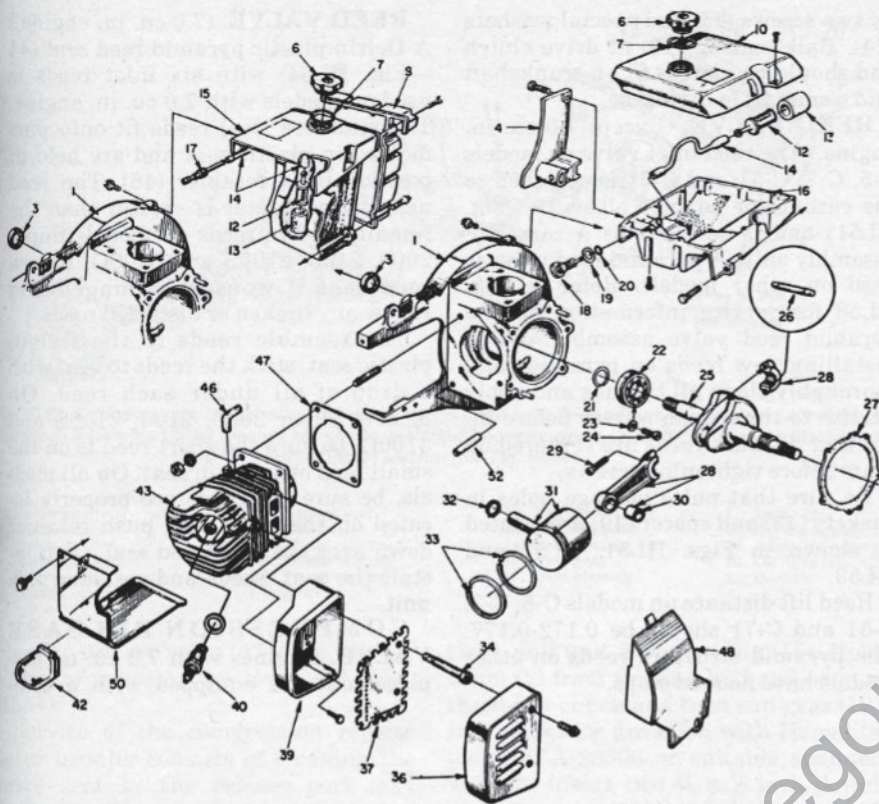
Exploded view showing model XP-1020 and model XP-1130 engine assembly. Models 1050 Automatic, 1130G, XP-1020 Automatic, XP-1000 and XP-1100 are similar. View shows fuel tank construction for both the direct and gear drive models.
